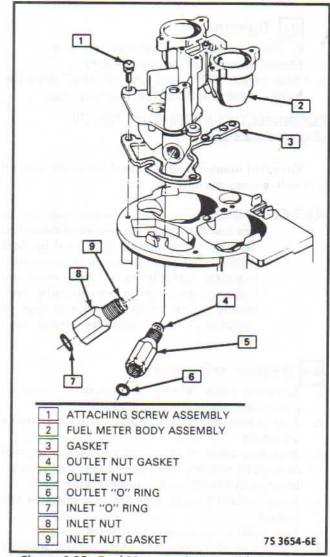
Fuel Meter Body Assembly - TBI 220
